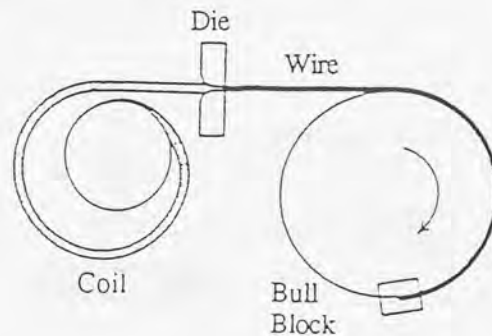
Schematic drawing of a bull block, after Dieter [11].
